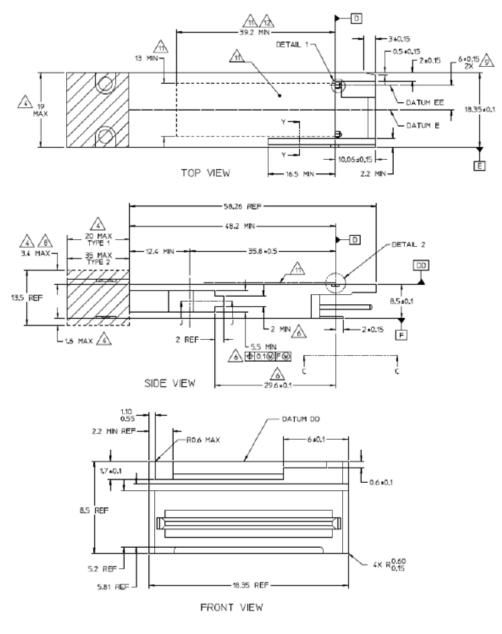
FTCD4323E2PCL Mechanical Dimensions.
